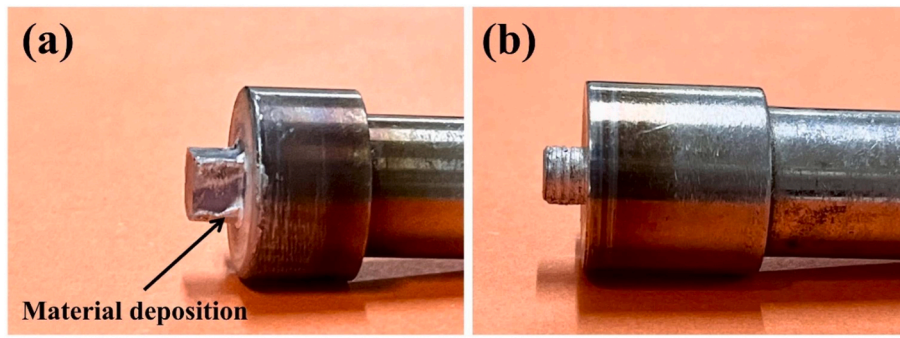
Tool geometries after welding (a) SQ tool, and (b) CT tool.
